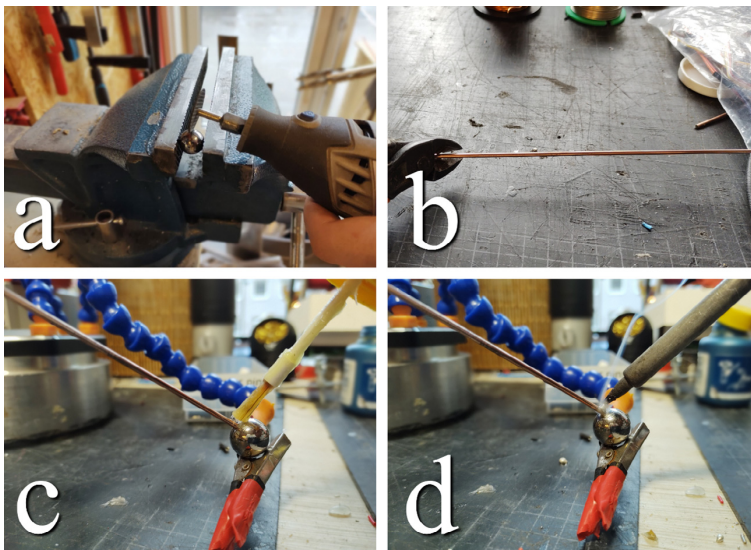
a) Grind flat surface on sphere. b) Cut welding rods to length. c) Align rod and sphere and apply flux. d) Solder.
